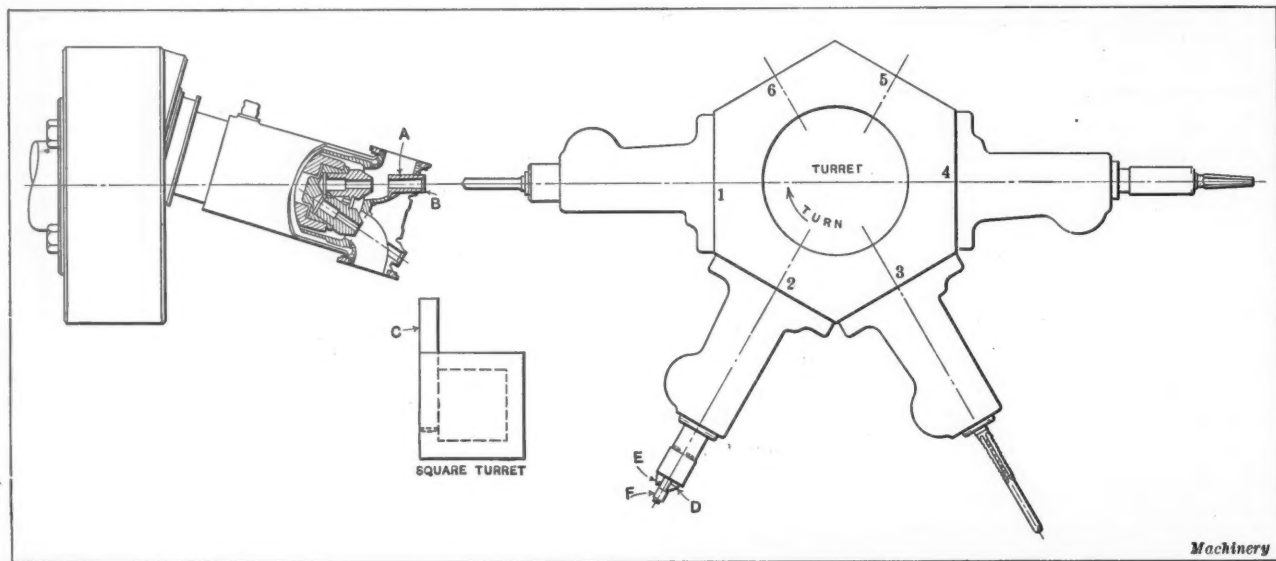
Tooling Equipment provided for machining the Valve Guide Holes in the Airplane Engine Cylinder Head
